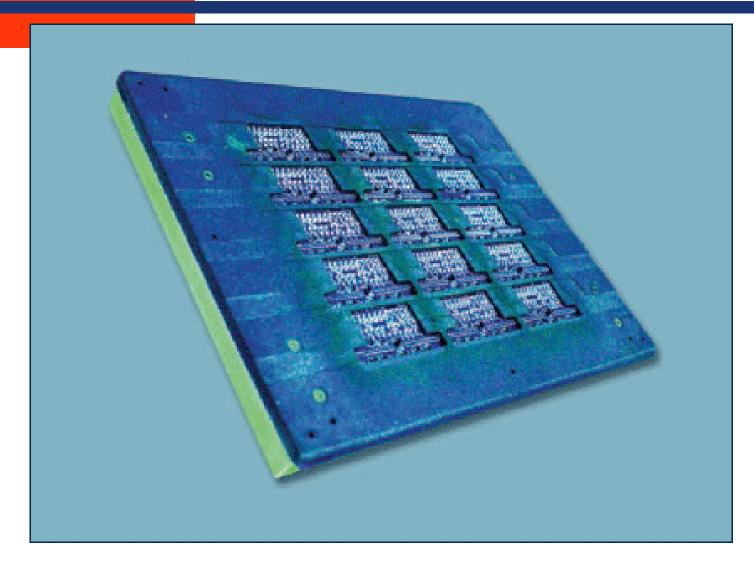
Bottom side of board is masked to only allow exposed pins to see the solder wave.
